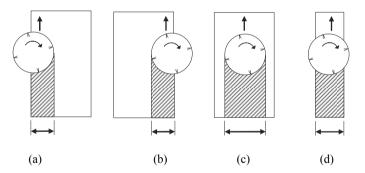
Milling types: a. Climb milling (down milling); b. Conventional milling (up milling); c. Slotting (channel cutting); d. Centre cutting
